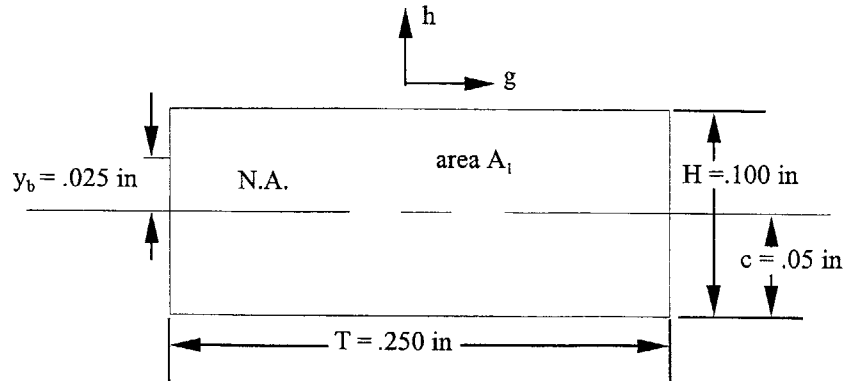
(This shows a cross-section side view of the rectangular portion of the slider.)
